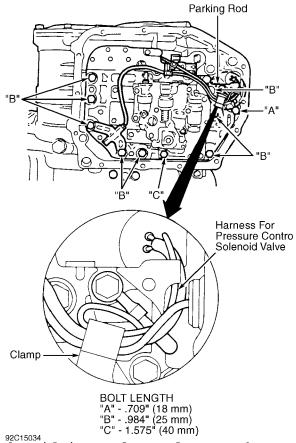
Identifying Valve Bolt Length, Location & Wire Routing Courtesy of Mitsubishi Motor Sales of America.
